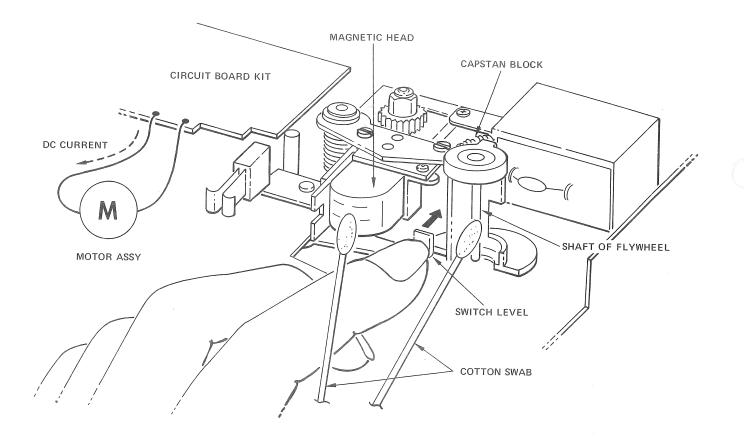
TAPE HEAD AND FLYWHEEL SHAFT CLEANING DETAIL
